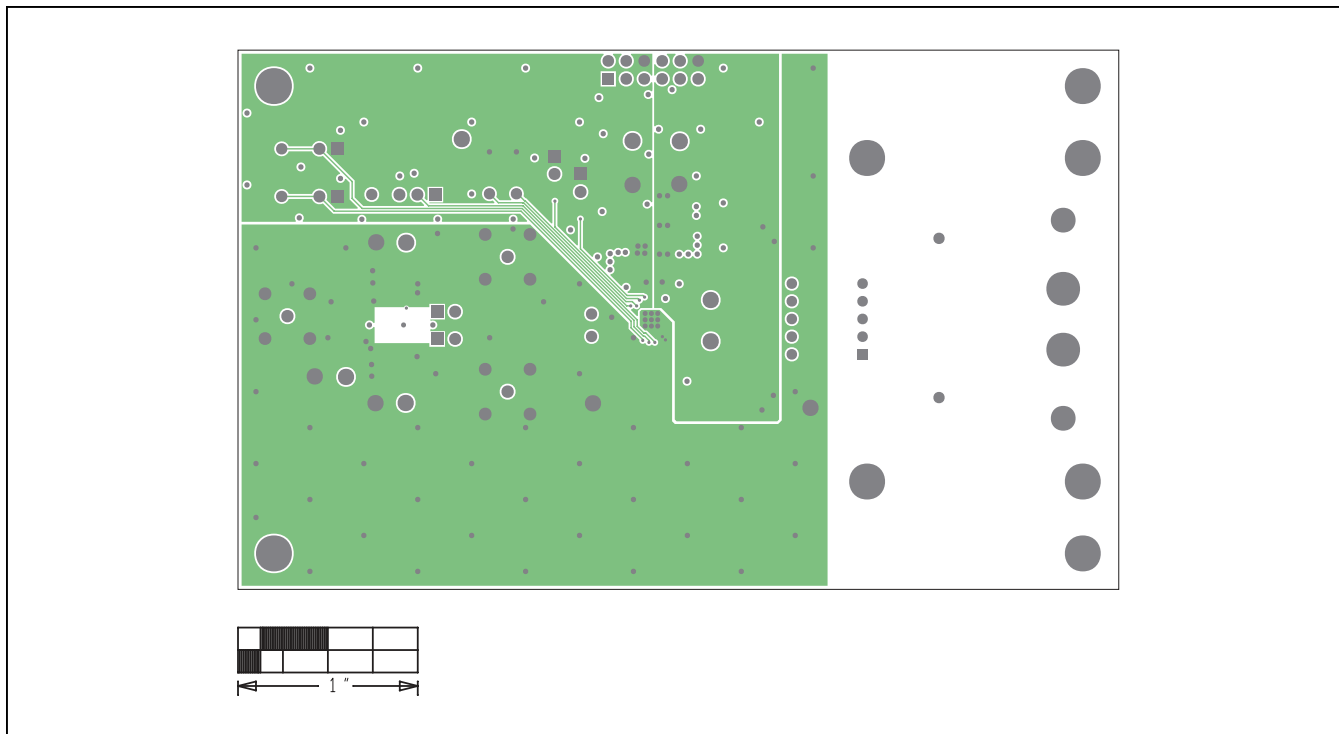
MAX44211 EV Kit PCB Layout—Inner Layer 3
